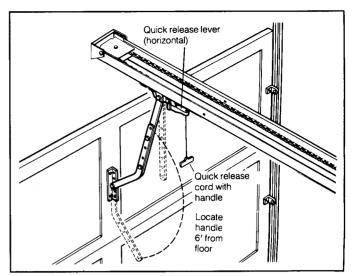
Connecting Door Arm Sections and Quick Release Cord
